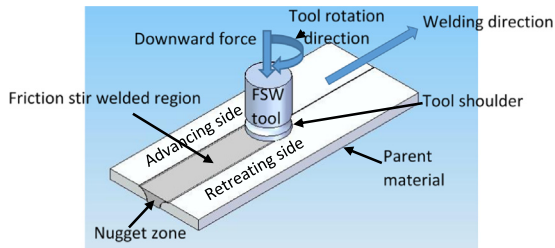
Schematic drawing of the friction stir welding procedure.
